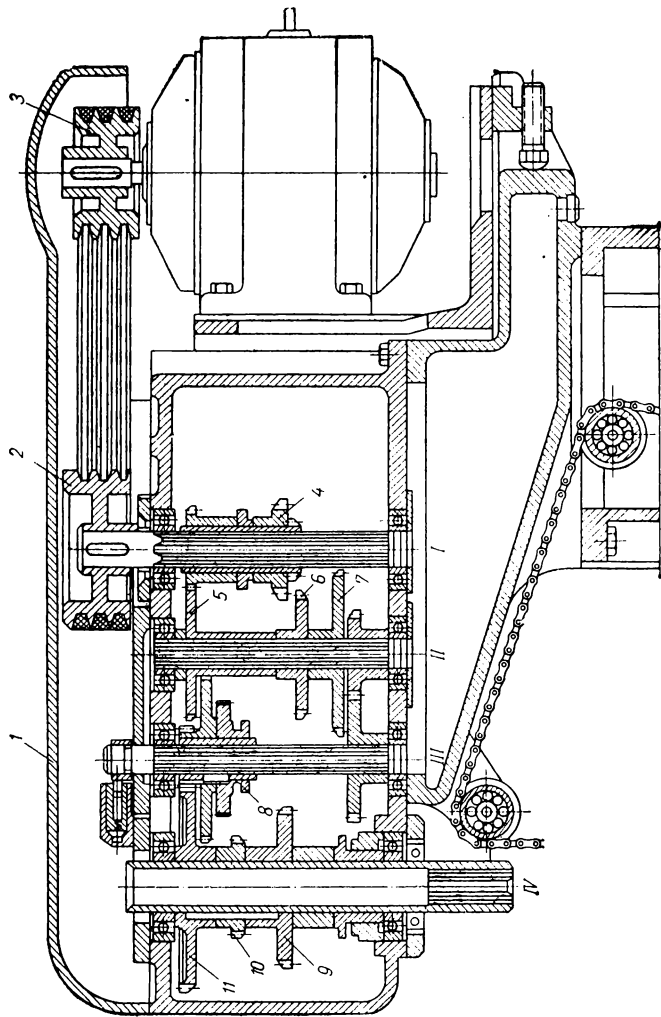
Speed gearbox of the upright drilling machine, model 2A135
